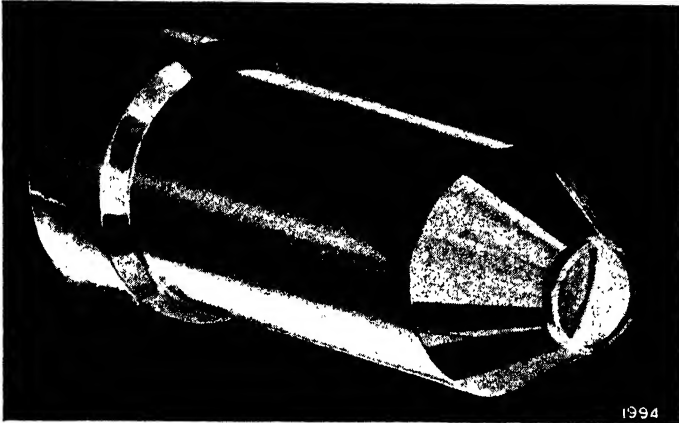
A DIESEL ENGINE INJECTOR SLEEVE 0-109 IN. THICK,
